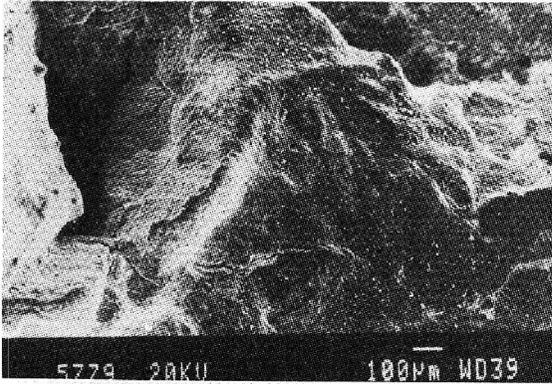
Cracks propagated in the weld zone possibly from pre-existing hole
